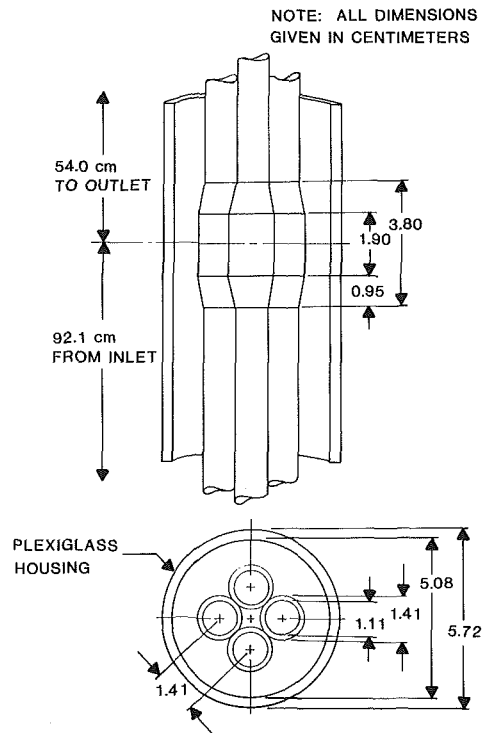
Side and top views of the sleeve-type blockages used in the four-rod bundle
